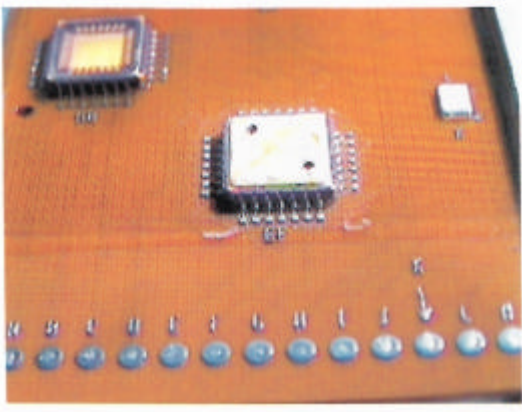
Illustrations of method for removing leadless chip carriers from pcb 68
